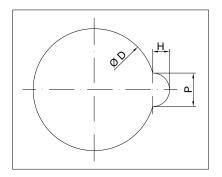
Hole geometry (Geometry Code R3) and dimensional requirements for NAS1329/1330 round headed blind rivet nuts installed to AIPS01-02-027 (Hole tolerance Code F1)
